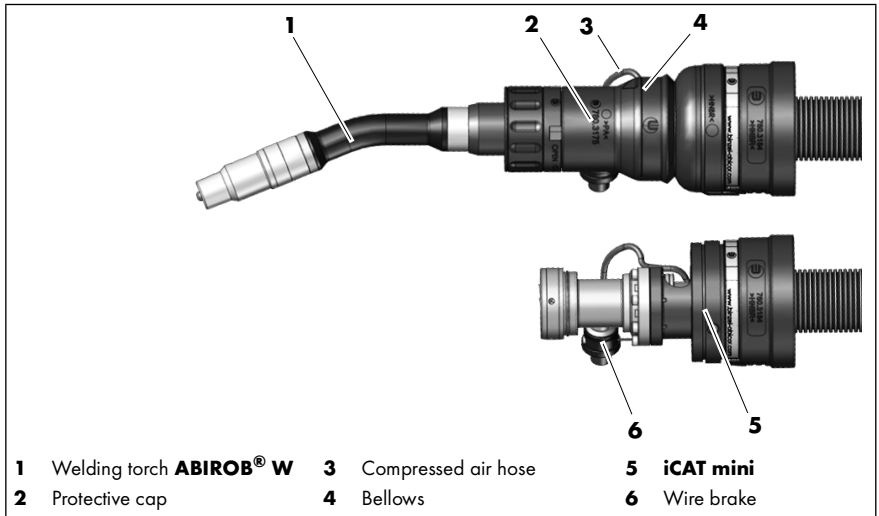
Cleaning – iCAT mini with wire brake and welding torch neck ABIROB® W
